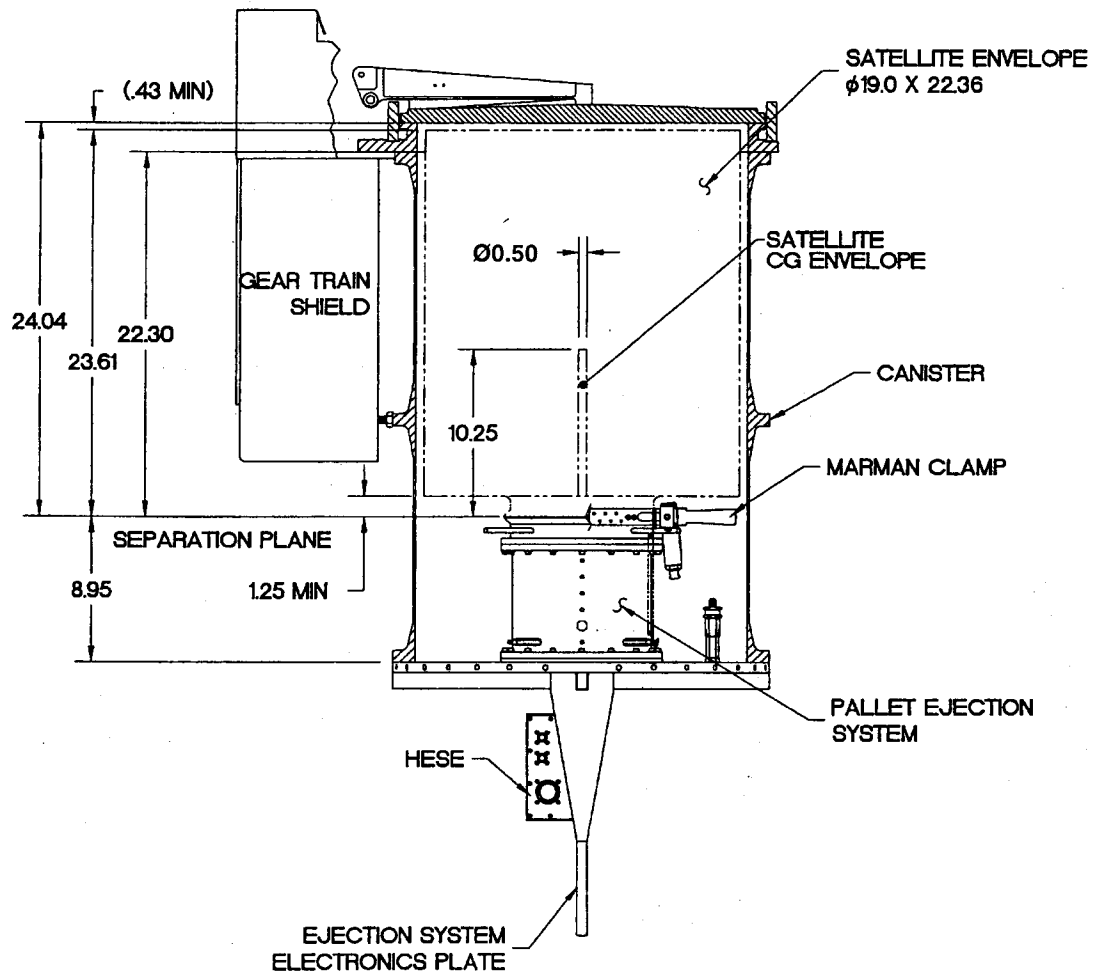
PALLET EJECTION SYSTEM WITH DOOR
